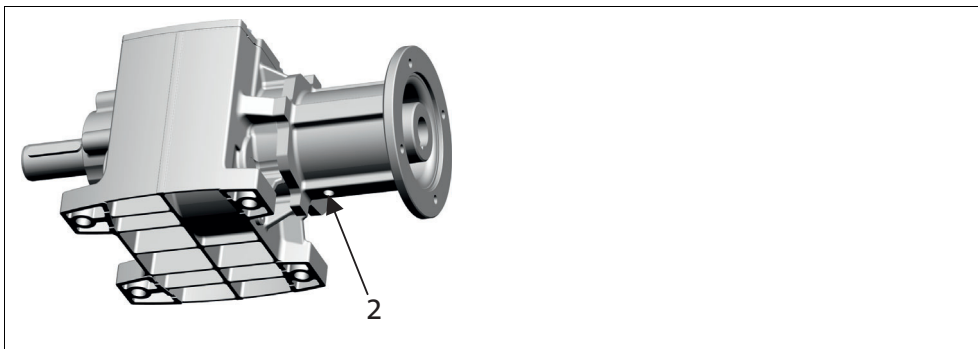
GNA standard motor flange; position of the leakage check bore hole
